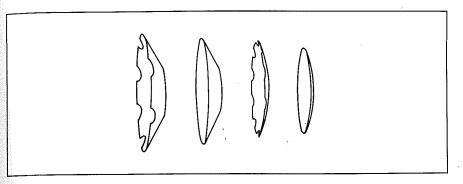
Disc shapes. From left to right: cone shaped, cut-out; shaped, plain; spherical, cut-out; spherical, plain.
